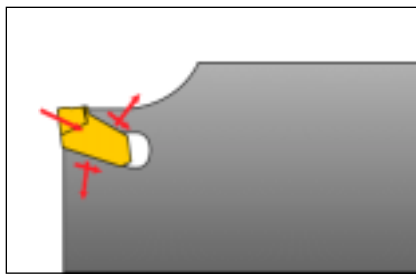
This clamping technique, pioneered by Iscar, involves no external screws or levers to hold the insert in place. It relies on the rotation of the part and tool pressure to keep the insert seated inside of a wedge-style pocket.
